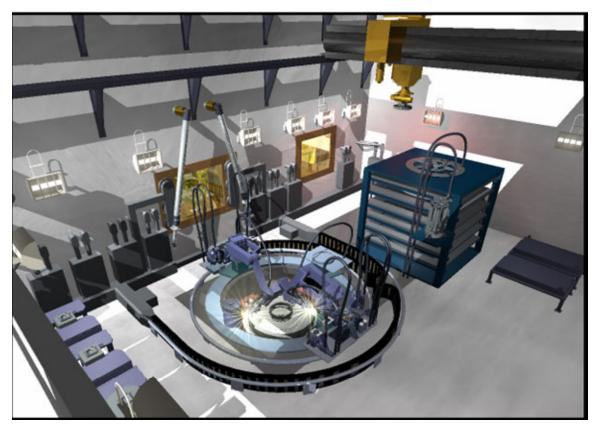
Illustration of the Yucca Mountain Waste Package Closure System welding a waste package lid in place.
